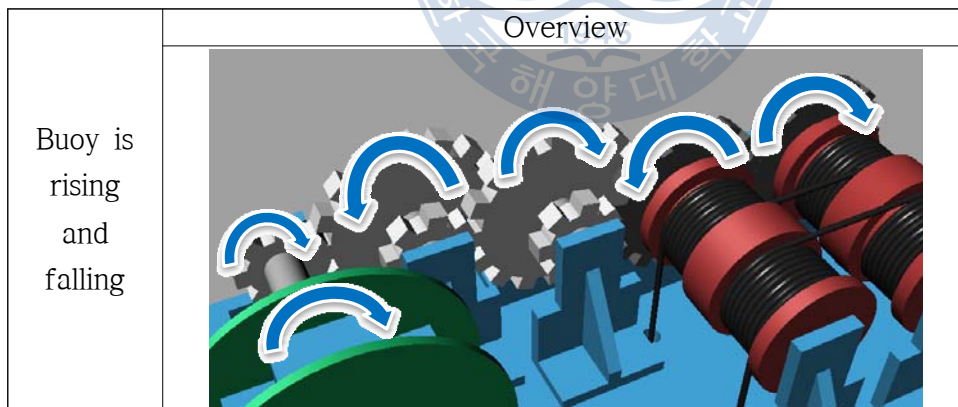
Rotating direction of gears and flywheel according to up and down movement of buoy
